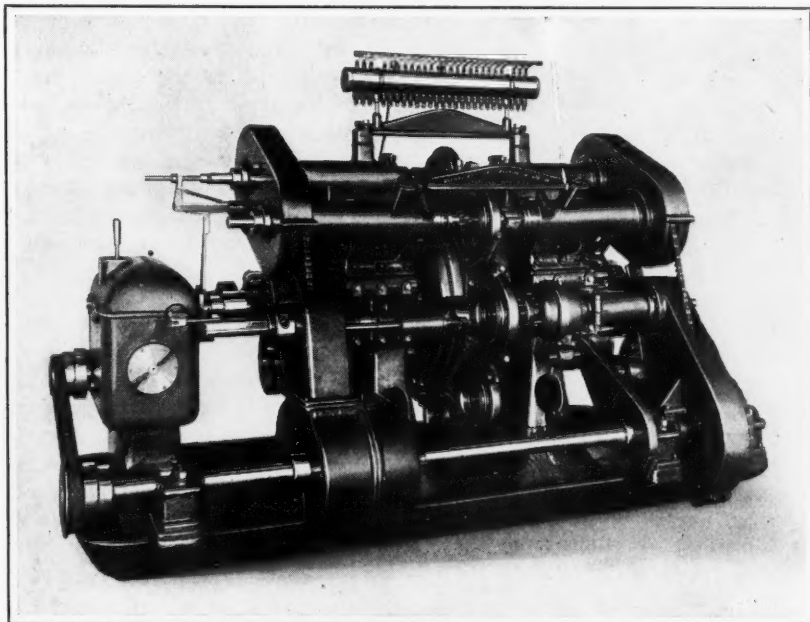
Rear View of Blomquist-Eck Duplex Multi-spindle Turret Machine
